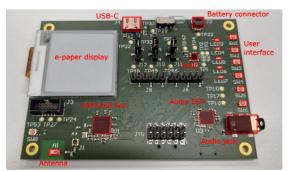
Manufactured Printed Circuit Board (PCB) of the designed smartwatch demonstrator.
